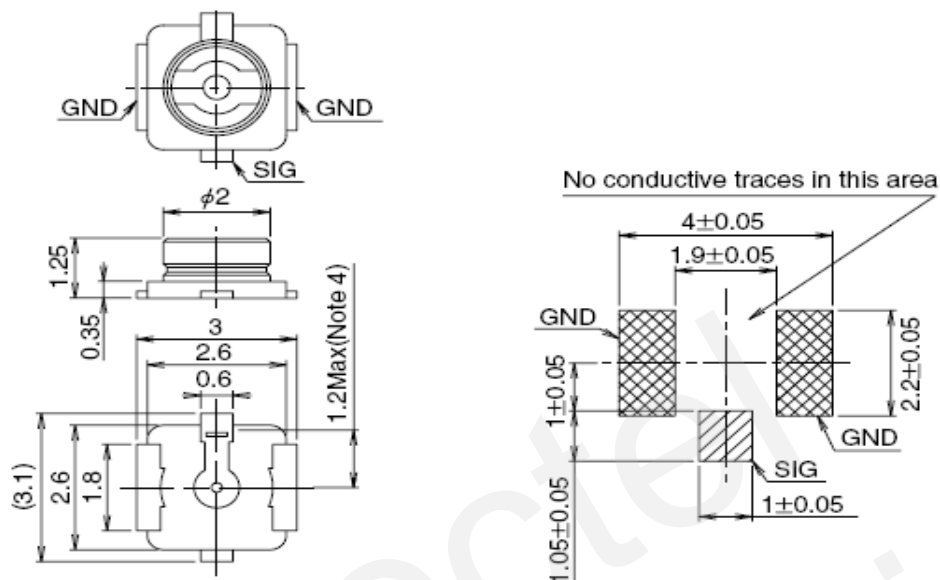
Dimensions of the UF.L-R-SMT Connector (Unit: mm)
